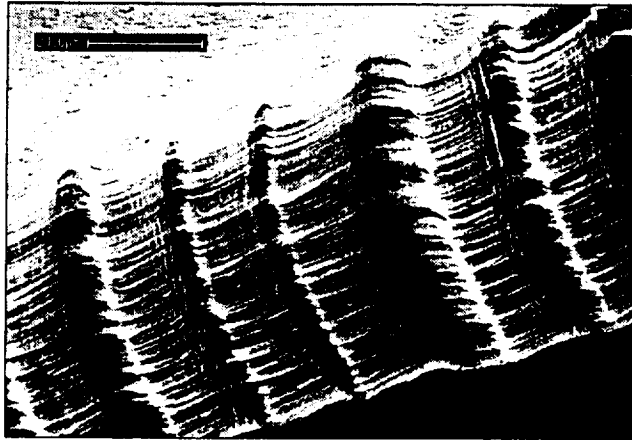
Detail of the crack surface of specimen B1.8. Crack propagation was right to left.
